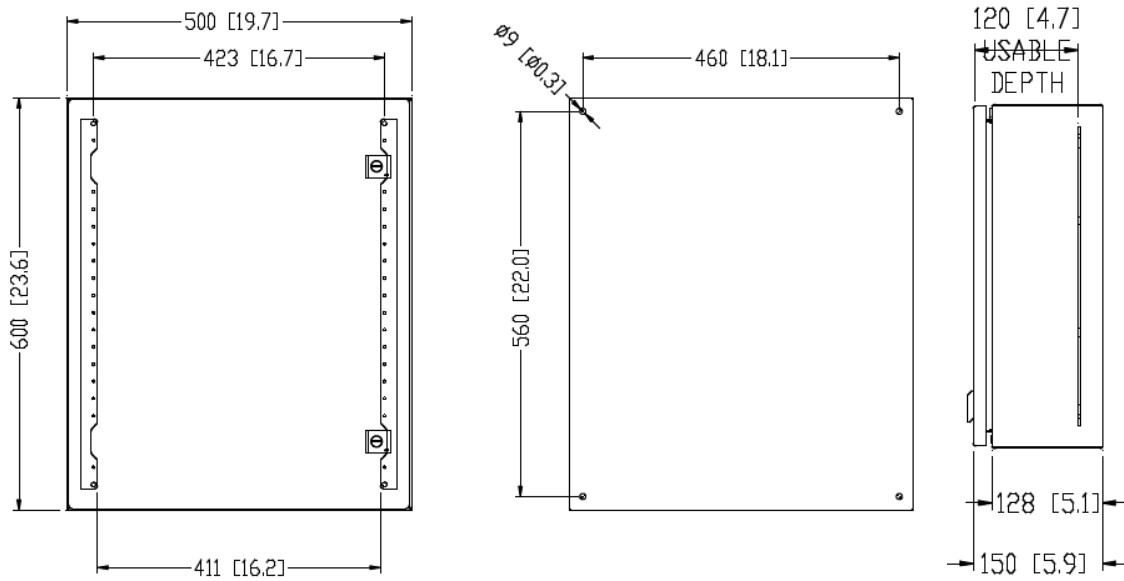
Enclosure Dimensions: Outside, Mounting, Depth
